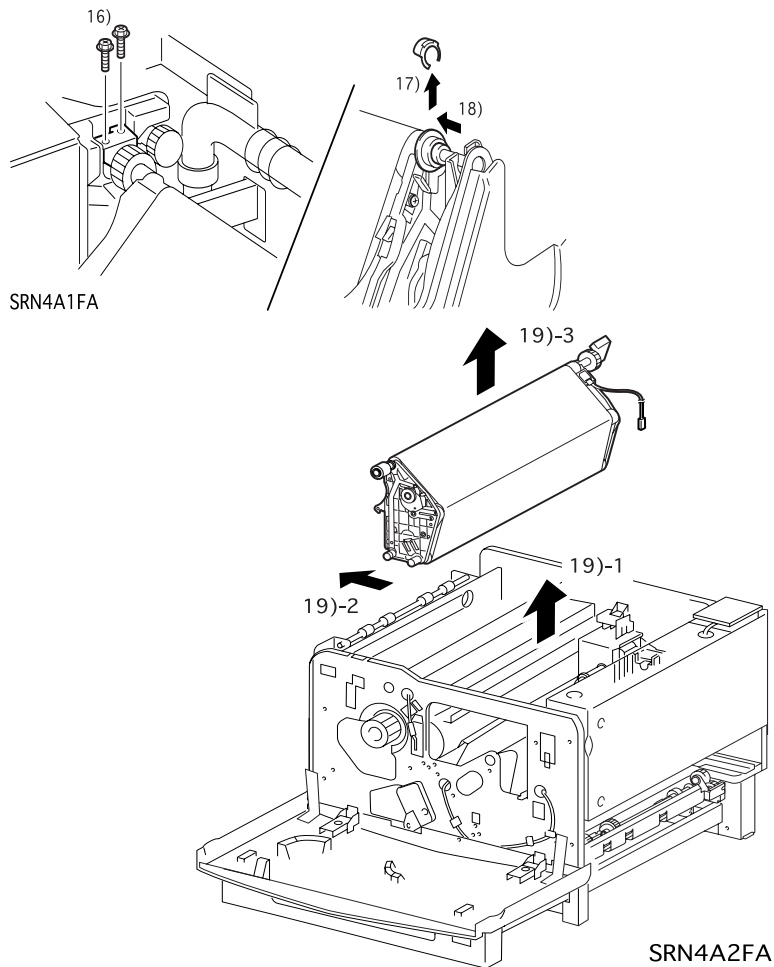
TRANSFER ASSEMBLY Removal (2/2)
